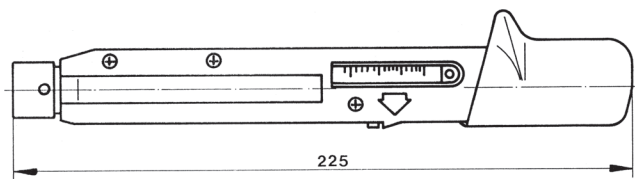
4 ... 20 N-m torque wrench Type 1300A39
